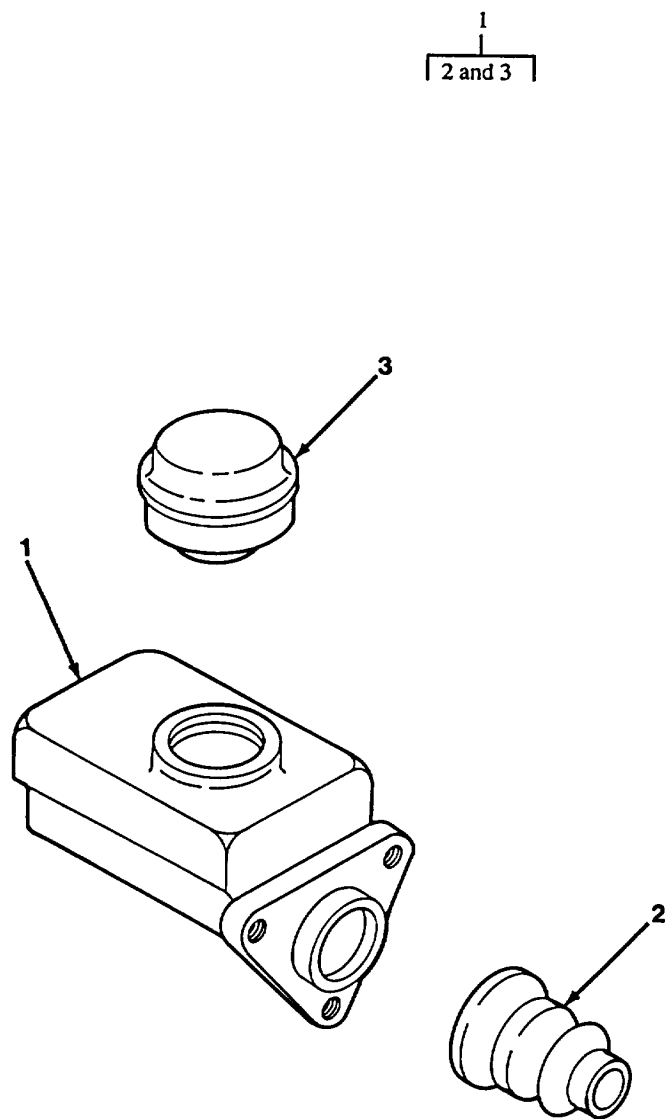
BRAKE ACTUATOR ASSEMBLY (XM979 AND XM1061).
